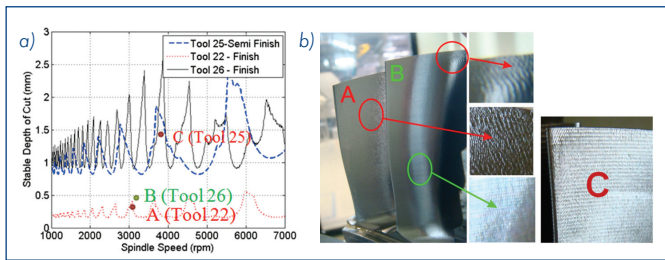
(a) Stability diagrams, (b) Surface finish by Tool 22 (A-severe chatter), Tool 25 (C-chatter), Tool 26 (B-stable)
